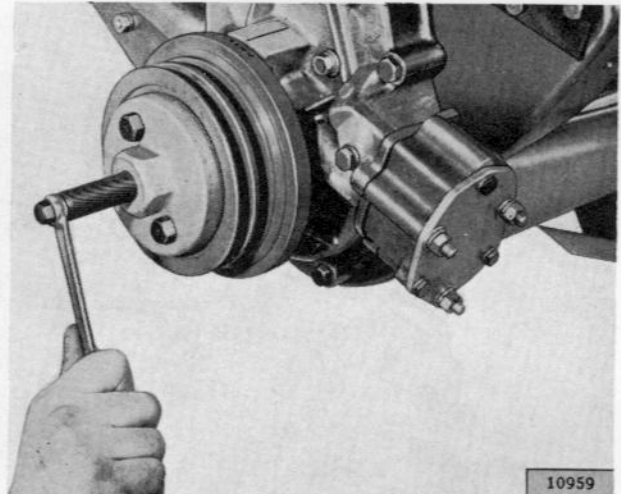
REMOVING VIBRATION DAMPER WITH PULLER
